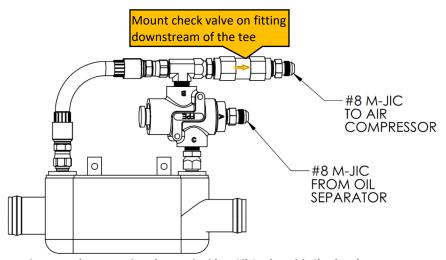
Thermostatic Valve on Liquid to Oil Cooler with Check Valve
